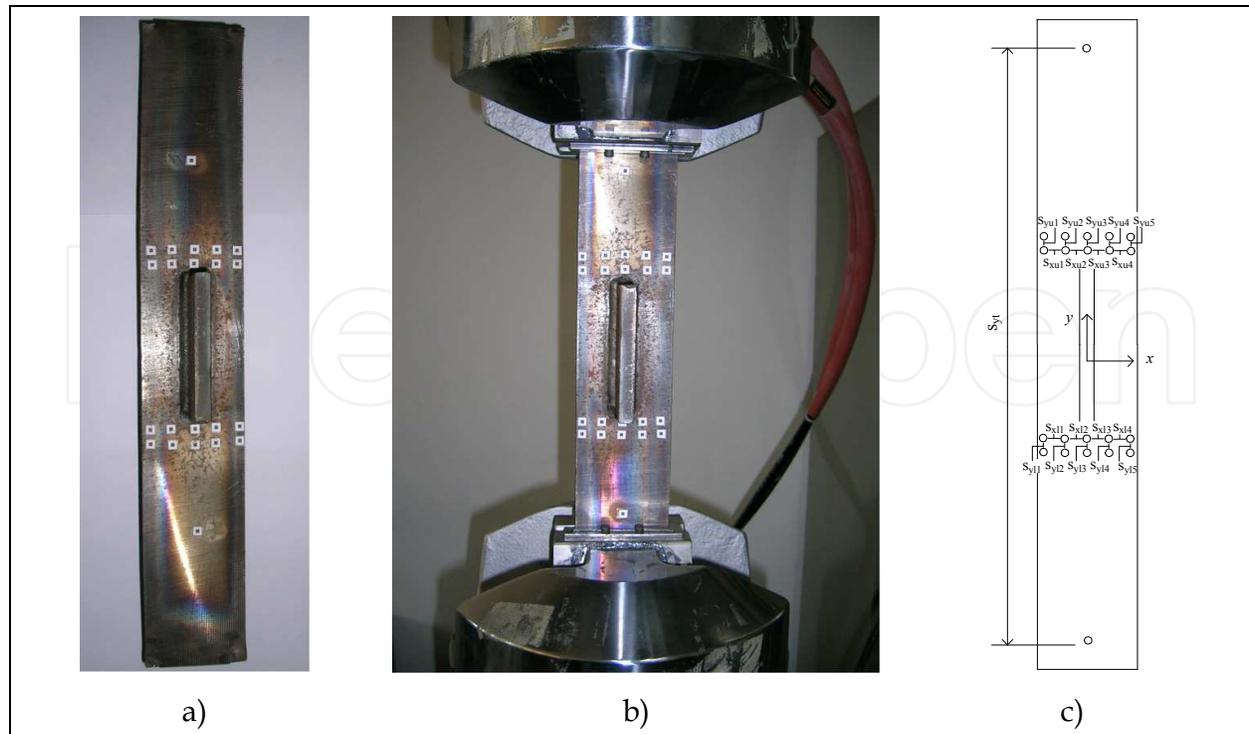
View of welded member: a) welded member marked measuring points, b) tensile test rig, c) Strain models
